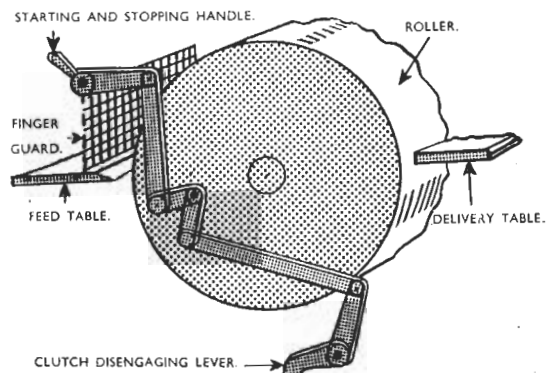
Fingerguard device for 36 × 24-in. flatwork ironing machine.
